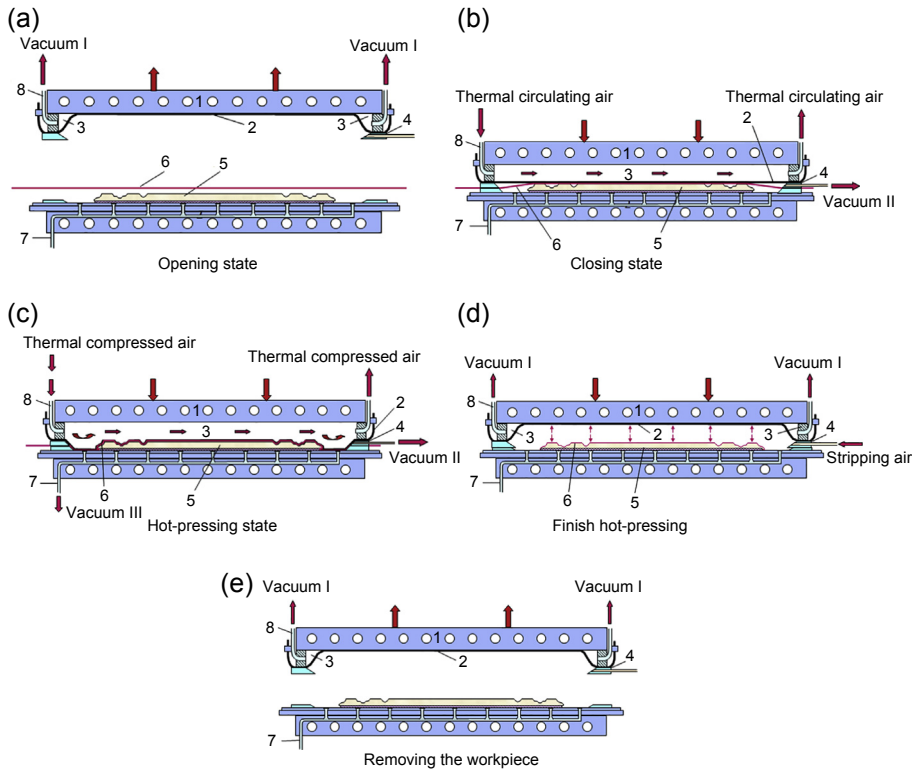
The typical working process of the molding machine. (a) Opennig state, (b) Closing state, (c) Hot-pressing state, (d) Finish hot-pressing, (e) Removing the workpiece.
